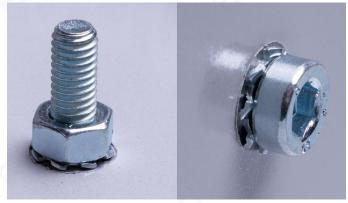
Ground screw on the floor (left) and on the rear wall.
